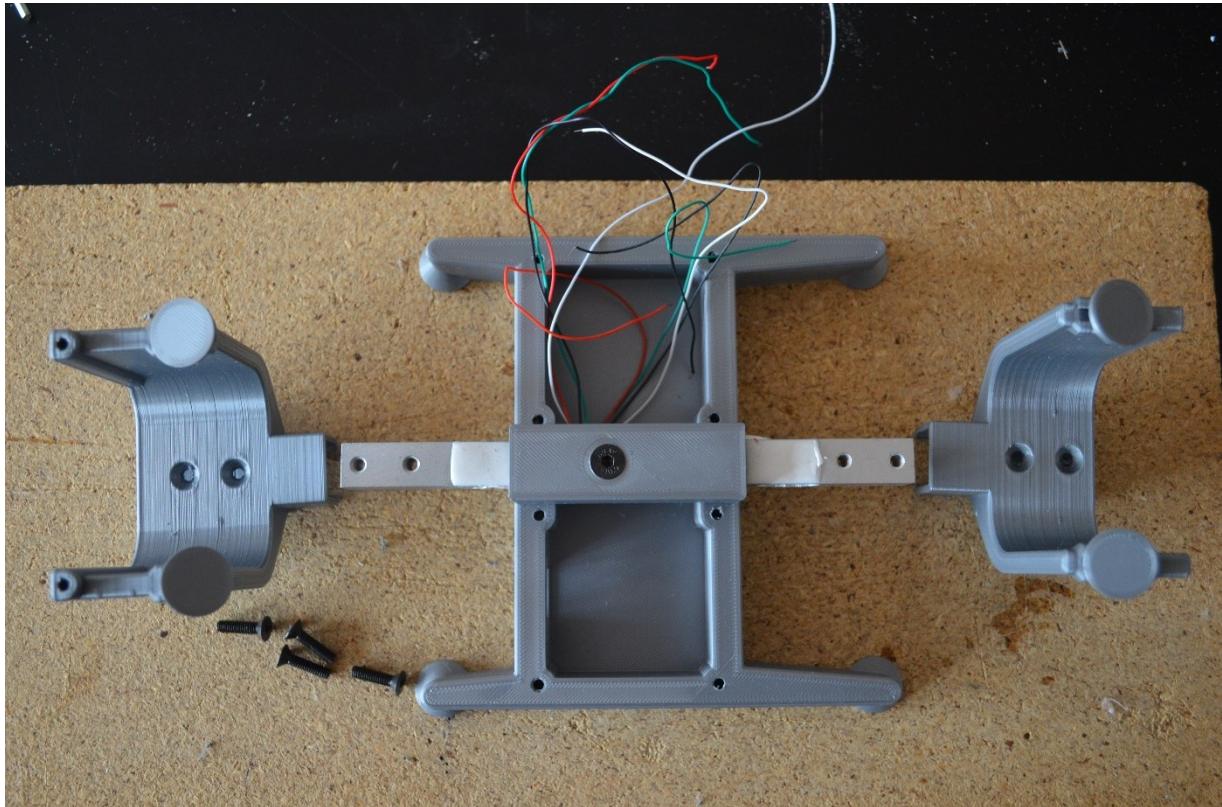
Step 3 – Both glider brackets are installed using two HEX M5 x 16 mm flat head screws..
